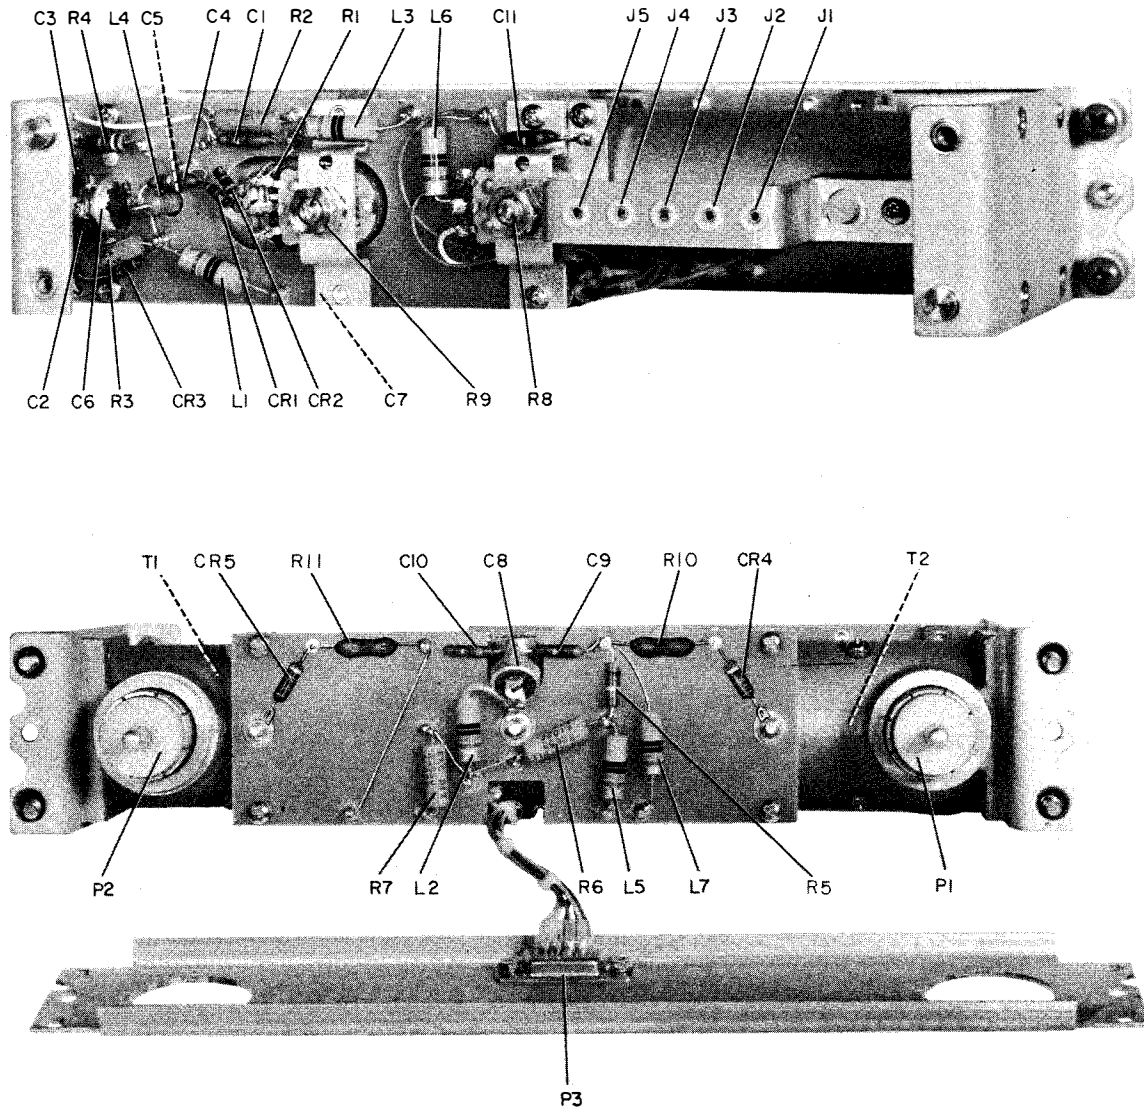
Loading-Phasing Circuit Assembly, Left Side, Parts Location
